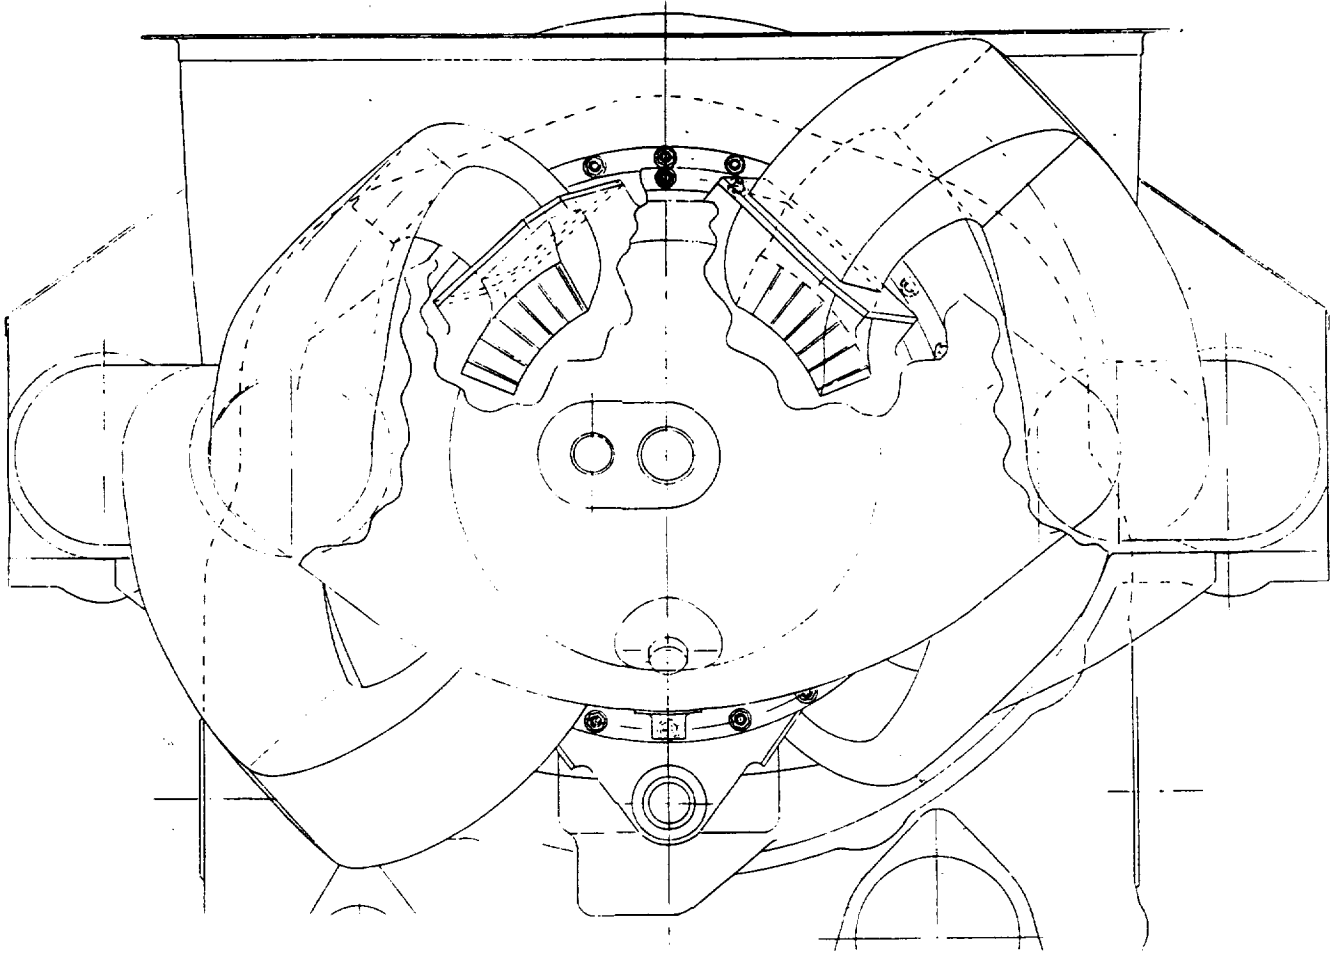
Cutaway View Of Wave Rotor Module Preliminary Design, End View.
